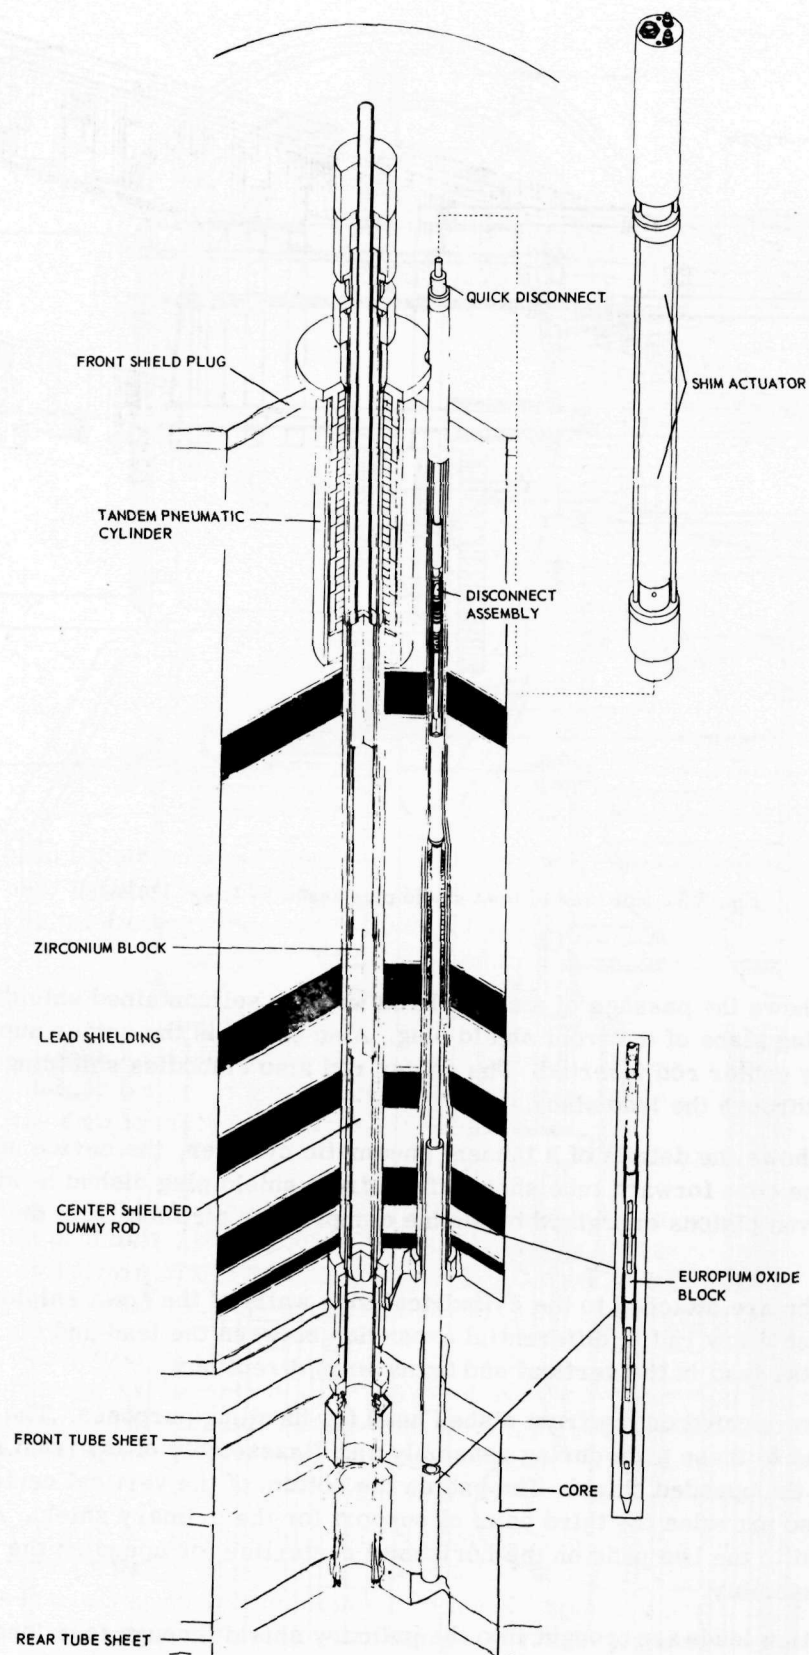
Control rod passing through front shield plug and core (Dwg. G-995)
